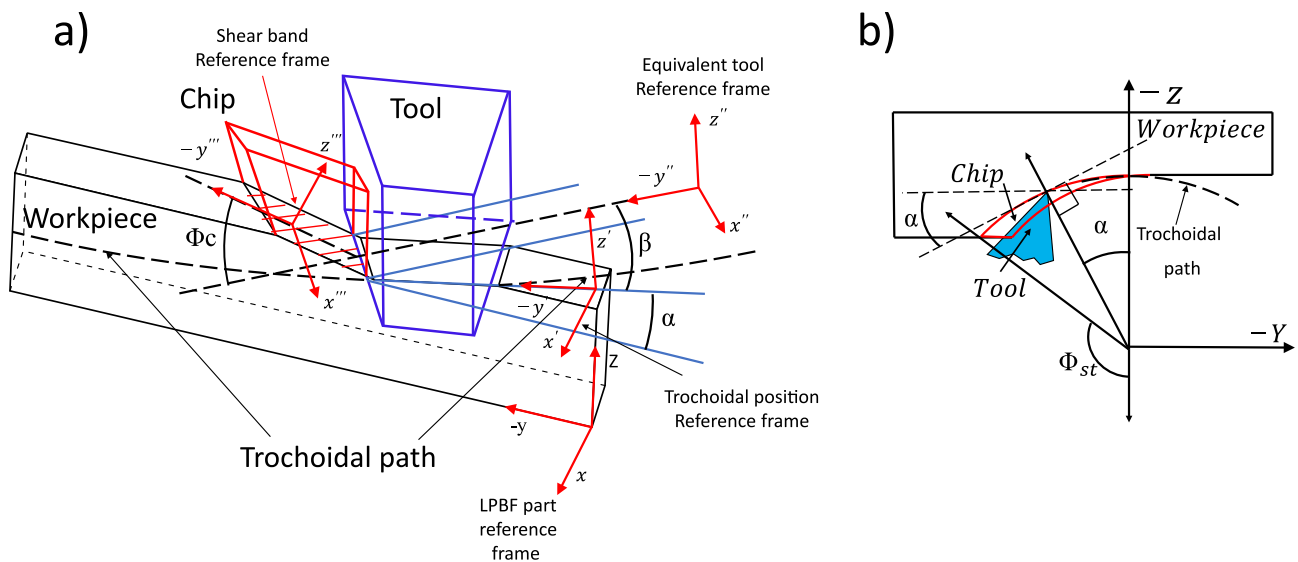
a) Cutting and shear band geometry; b) Details of engagement by the angle α .
